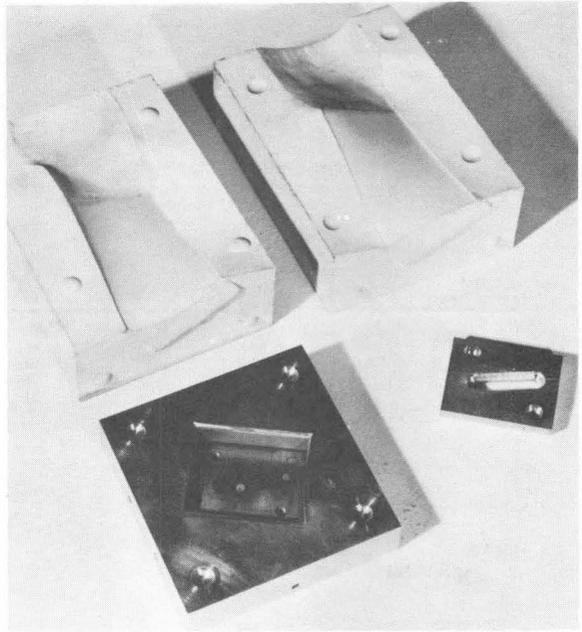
Completed plaster mold halves, mold box end and segment with casting groove.
